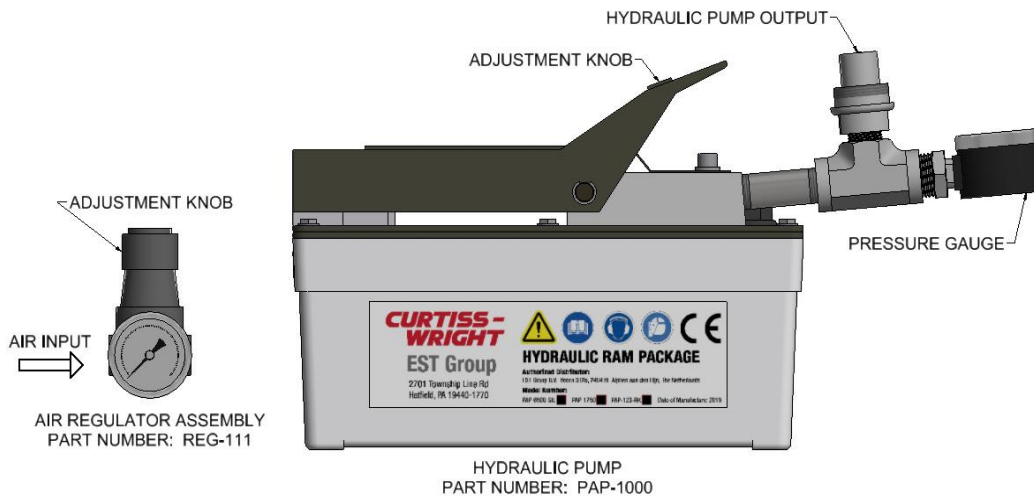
AIR REGULATOR ASSEMBLY & HYDRAULIC PUMP
